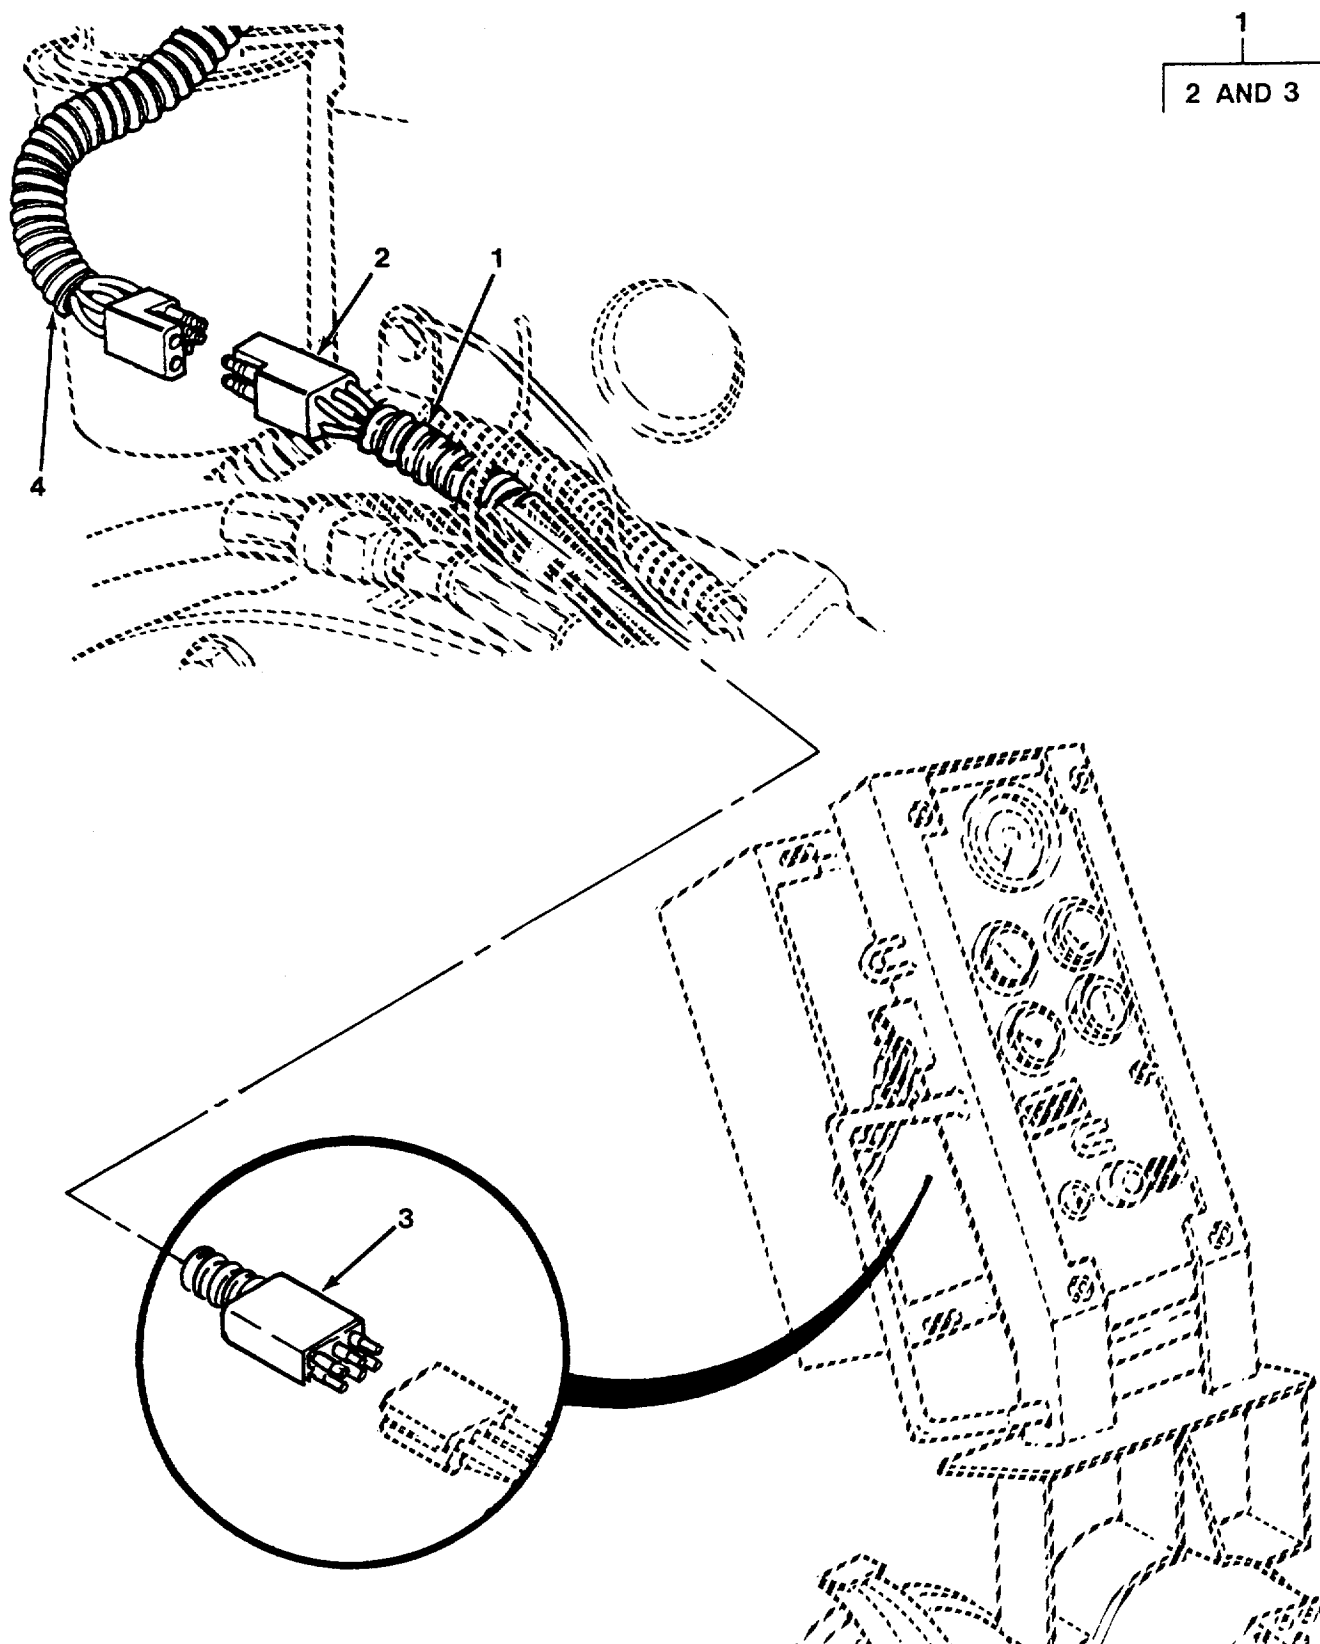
ENGINE WIRING HARNESS AND GAGE CABLE ASSEMBLY
